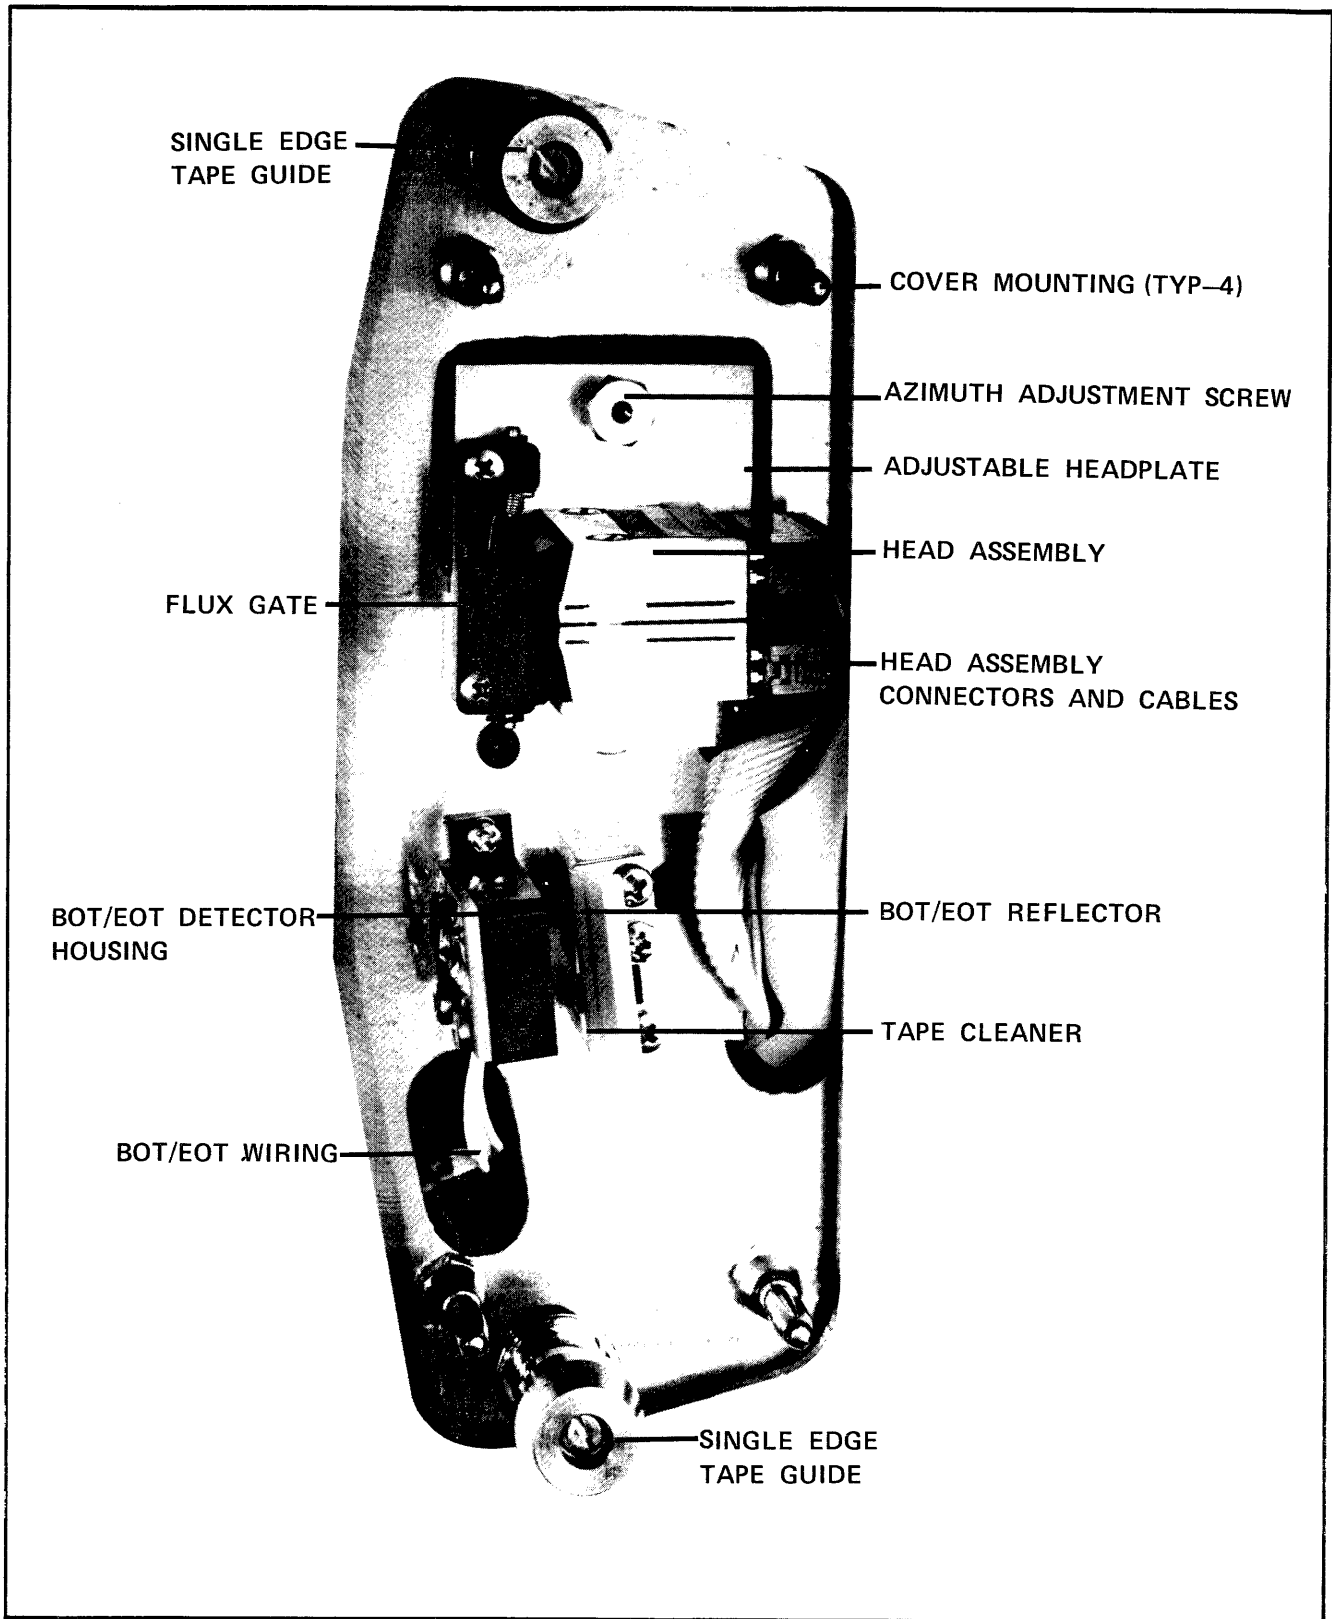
HEADPLATE ASSEMBLY DETAILS
